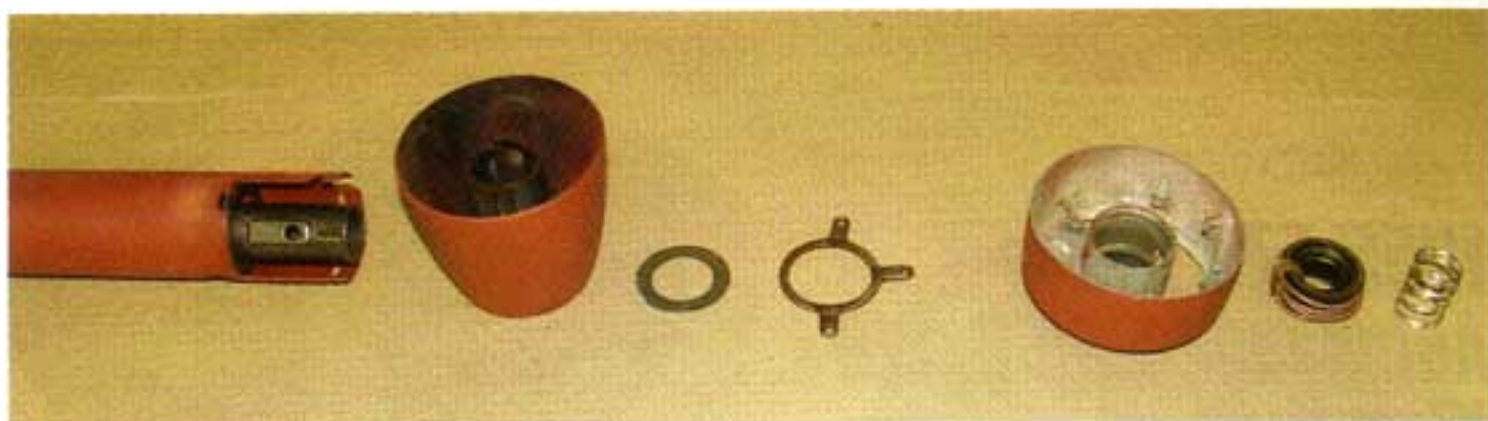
The upper mast jacket is made up of the turn signal housing, the shift collar, a thrust washer, the turn signal locking plate, the upper column bearing, a spring and a split washer that keeps a load on the upper bearing. This photo shows all the parts in the order of the assembly.
